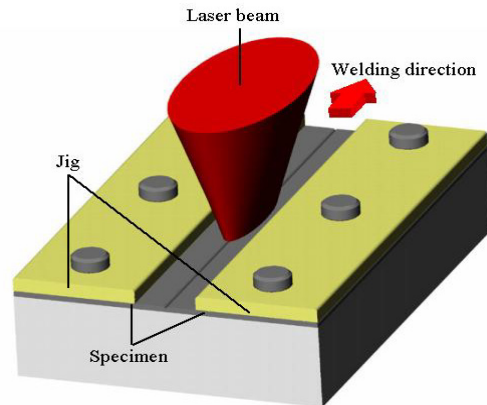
Schematic illustration of micro-welding with elliptical laser beam.
